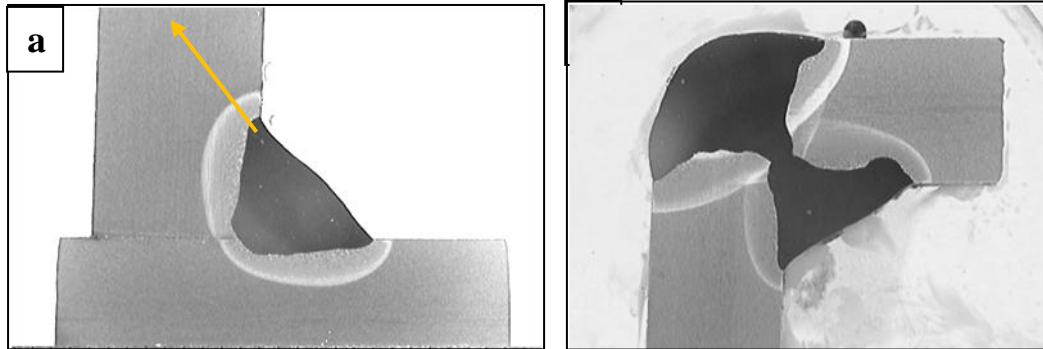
Macrophotograph showing the weld geometry and orientation of hardness traverses for: a – single and b - multi-pass weldments.
